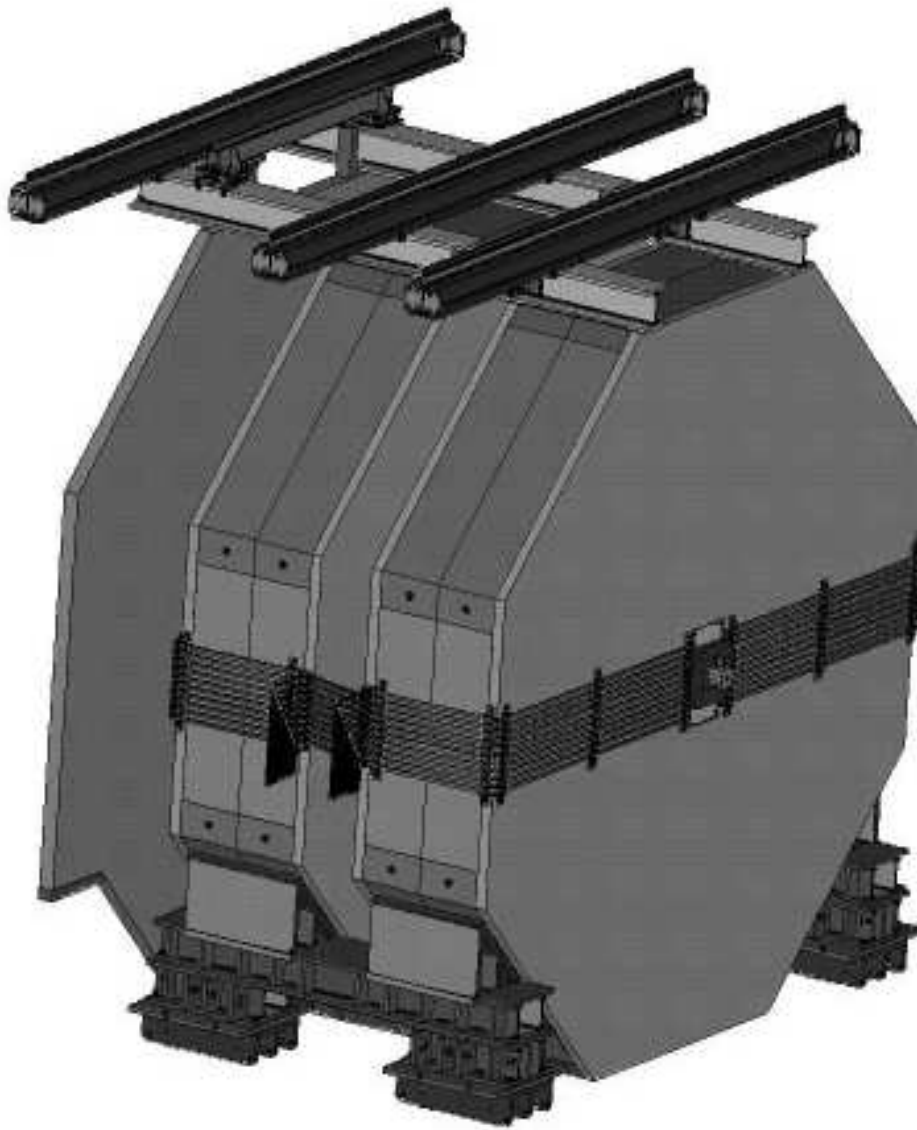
Toroid pair and B2 compensating dipole assembly mounted on Hilman rollers ready for the move from the assembly hall to the collision hall.
